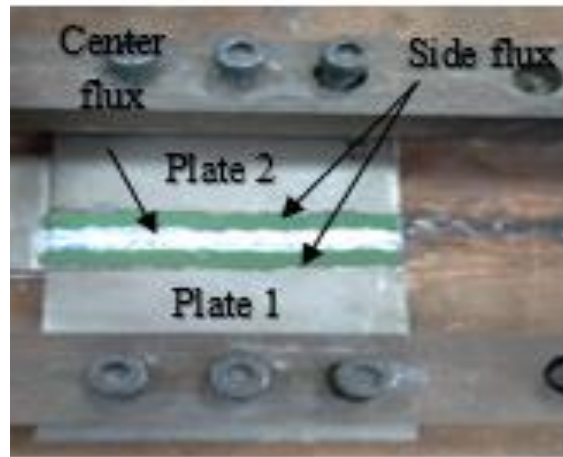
Flux applied in FZ –TIG welding
